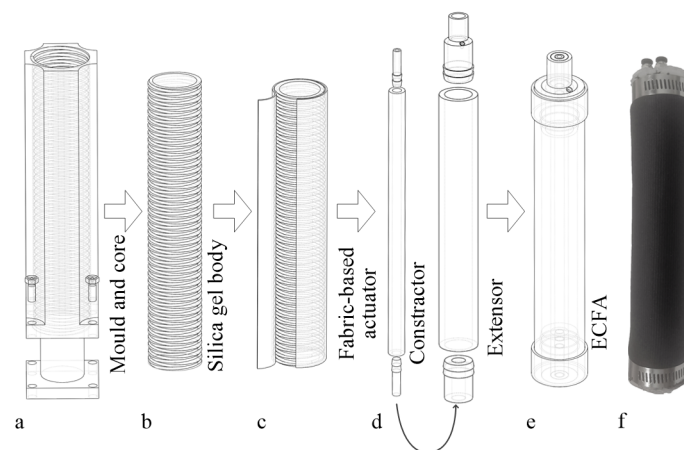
Schematic diagram outlining stages of the actuator fabrication process. (a) In the first molding step, the actuator is molded using 3D printed mold and core. (b) The bladders are obtained by demolding, and fiber reinforcing thread is wound along the length of the bladders. (c) Then the anisotropic fabrics are wrapped on the bladders, and the junction is sewn to obtain the fabric-based actuator. (d) Insert the connector into the two ends of the extensor and the contractor, then insert the contractor into the extensor, seal and connect the junction is with glue. (e) Clamp two ends of the actuator with two rings. (f) Physical body of the soft actuator.
